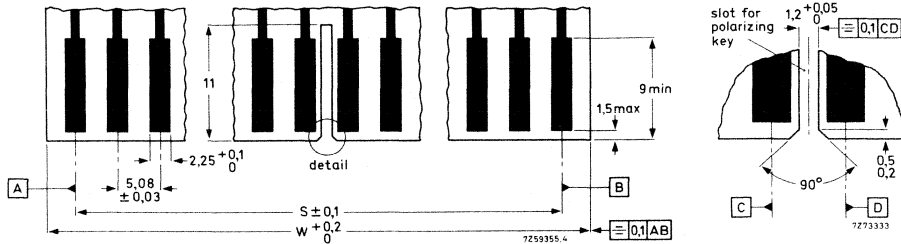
Recommended dimensions of the printed-wiring board; see Table 4 for dimensions S and W.
